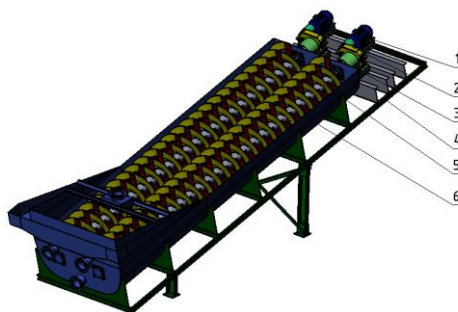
Screw classifiers 2KSP-12×84: 1 - motor; 2 - gearbox; 3 - clutch; 4 - support frame pama; 5 - screw; 6 - trough
